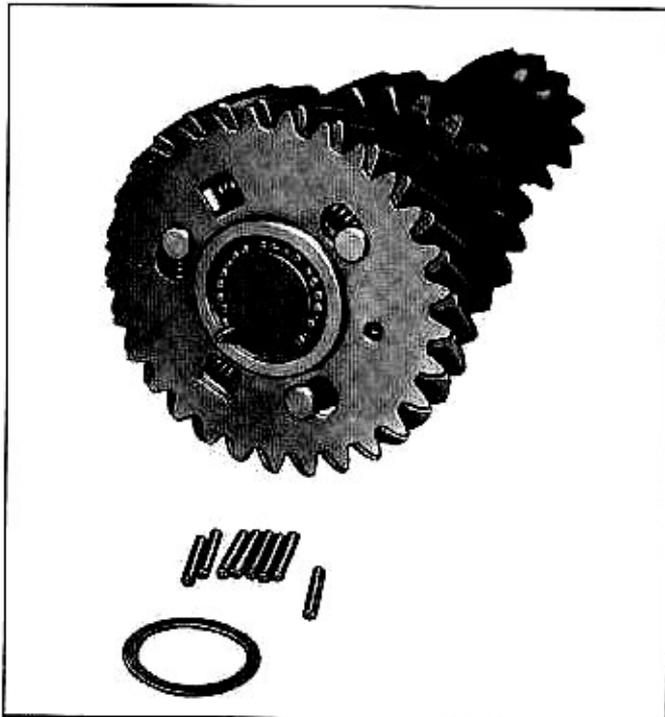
A—Loading Countergear Bearings Using Tool J-22246
